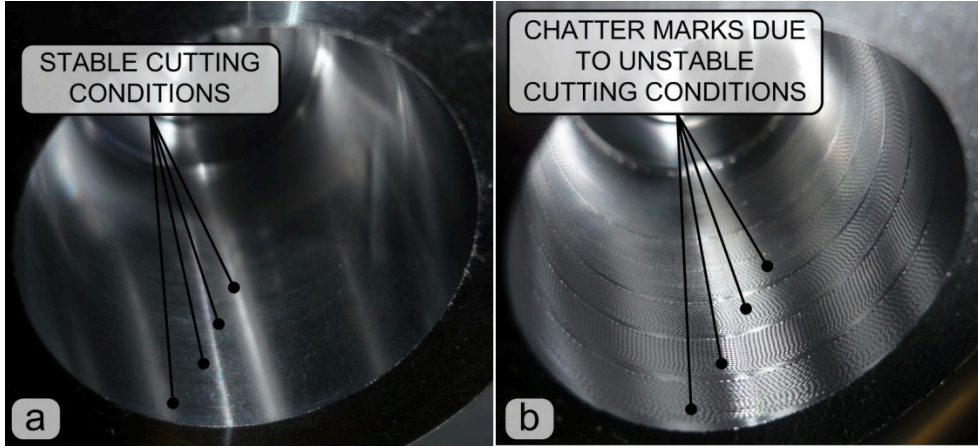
Visual inspection of machined surface to identify chatter marks (Steel boring bar, $D=16\text{mm}$, $r_t=0.2\text{mm}$, C45 workpiece, $a_p=0.3\text{mm}$, $f=0.08\text{mm/rev}$, $n=4100\div 4900\text{rpm}$, $L/D=5$ (a) and $L/D=6$ (b)) [42]
